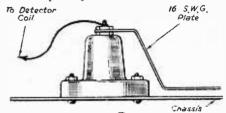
Details of the insulator "X" of Figs. 3 and 6.
